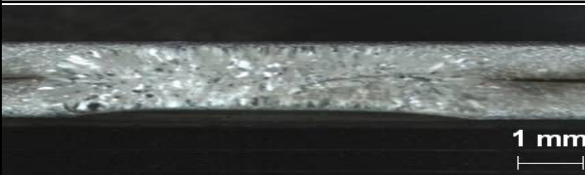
Indentation depth of spot welding with electrode tip diameter (1.6t)
